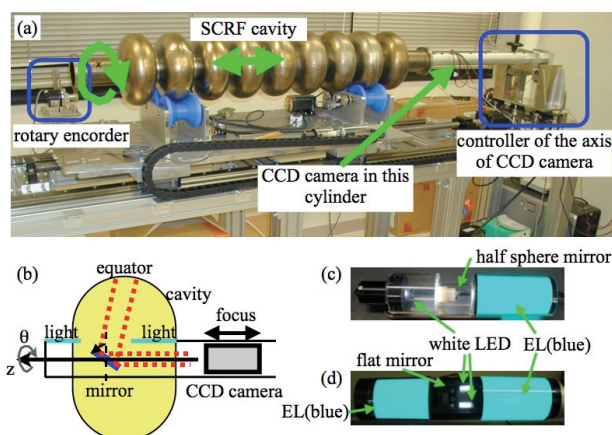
(a) Overview of our inspection system. (b) Drawing of the inside the SCRF cavity, cylinder and attachment. (c) Attachment for taking whole angle pictures of the cavities' inner surface. (d) Attachment for taking local pictures. EL: electro luminescence.
